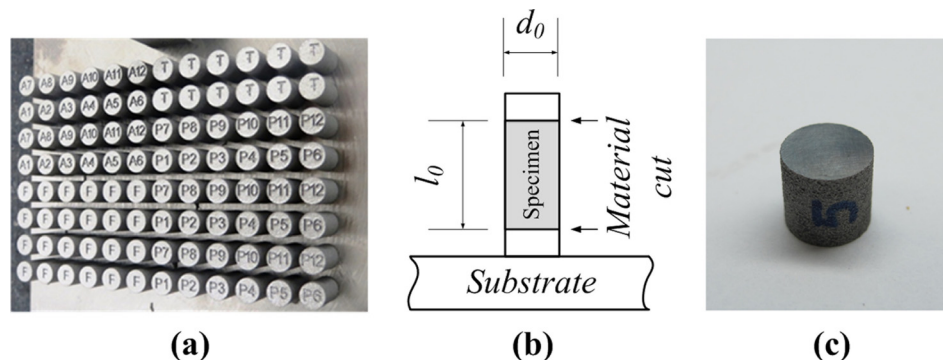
(a) An example of a batch of specimens, (b) wire cutting of specimen, and (c) compression specimen
